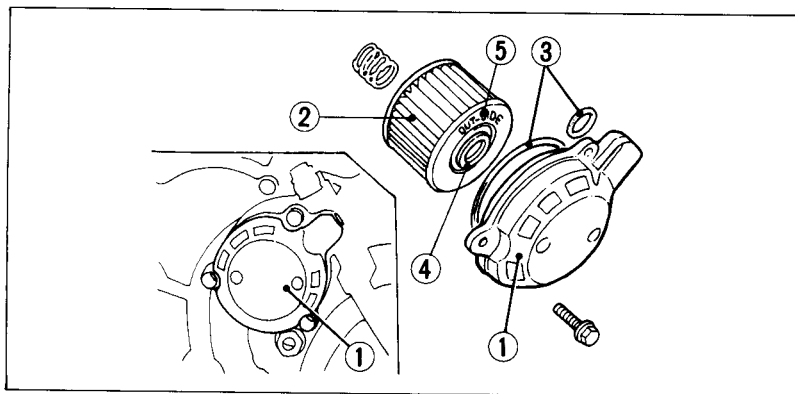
(2) Oil filter	(4) Rubber seal
